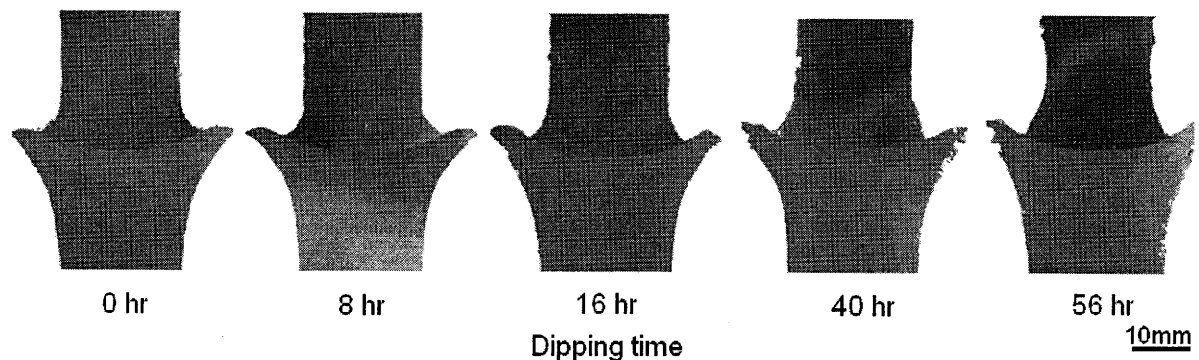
Macrostructures of corrosion tested friction welded joint. (up side : AZ31 alloy)
